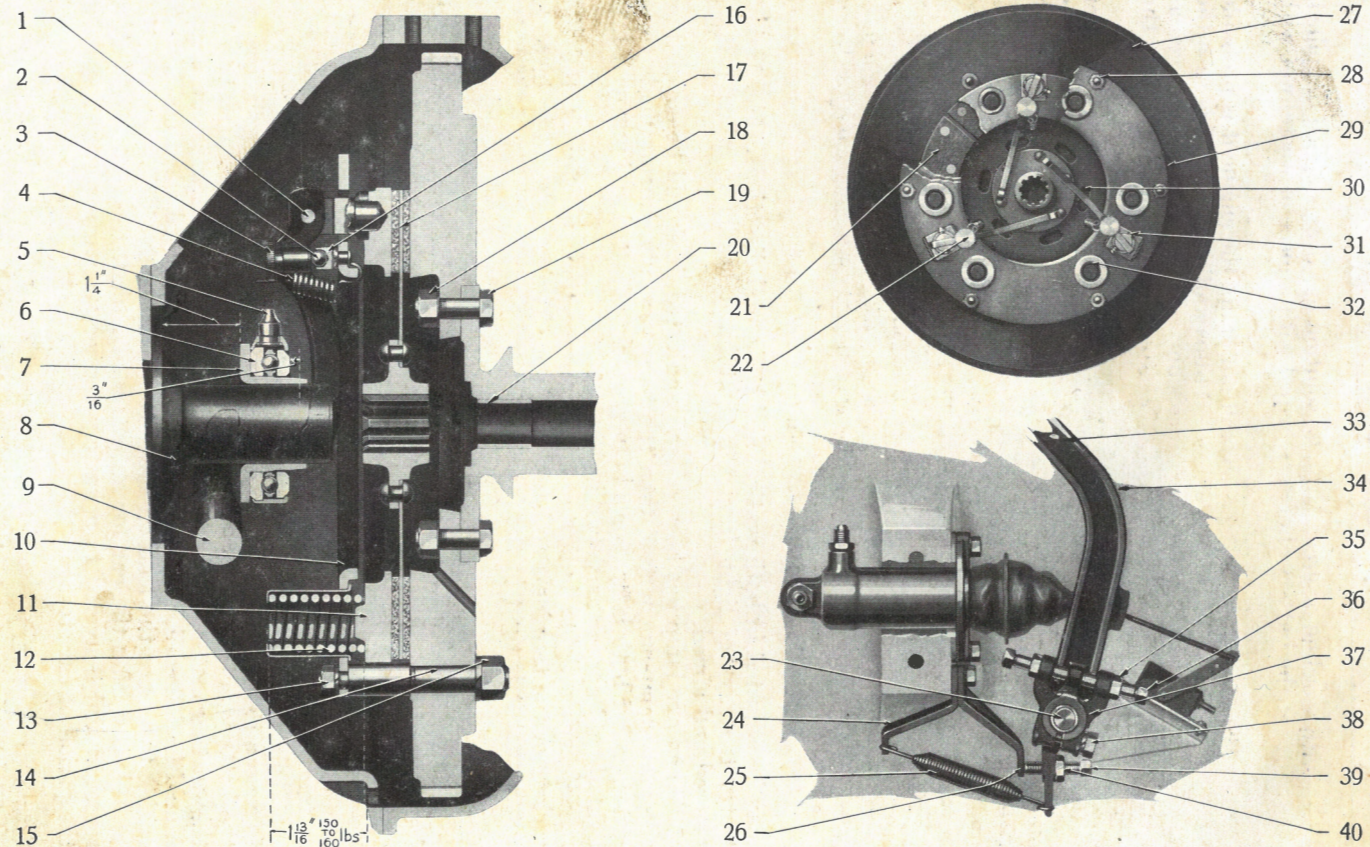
Clutch and Pedal Adjustments (Four-Wheel Brake Equipment)
